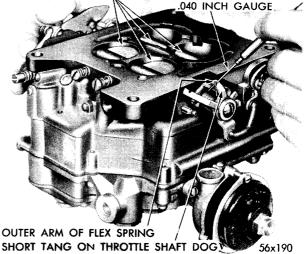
Checking Opening of Secondary Throttle Valves (Step 4)
